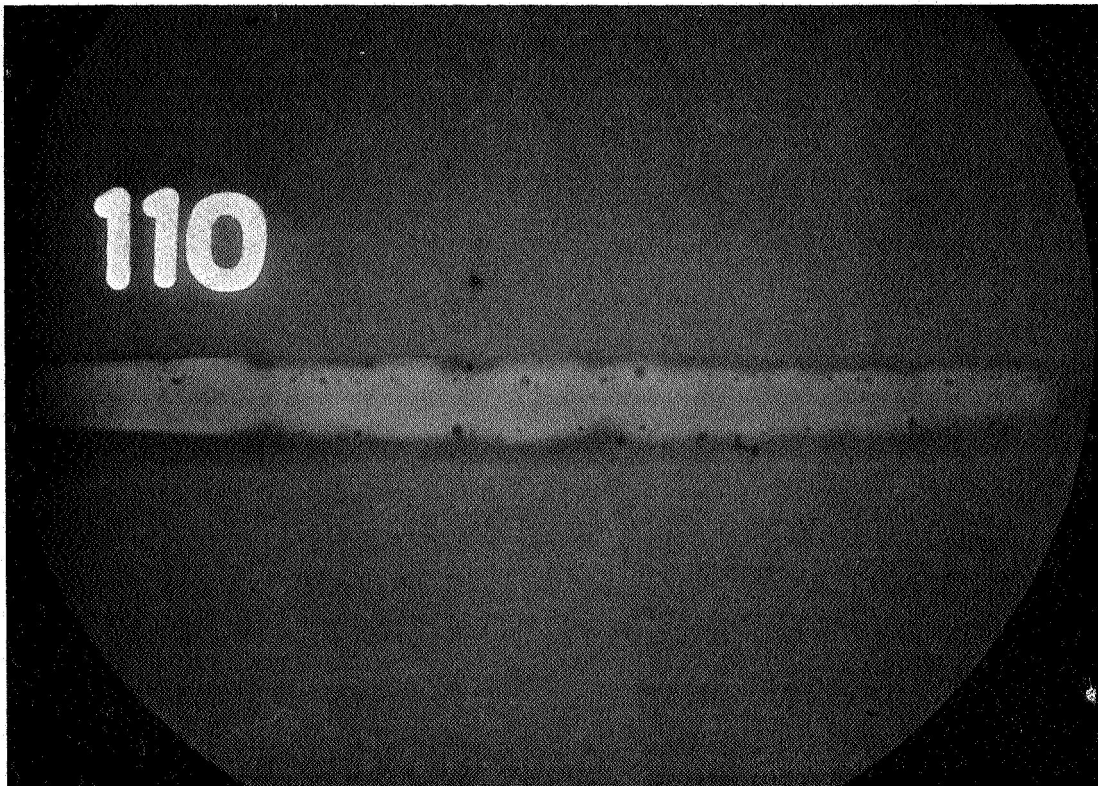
Out-of-Vacuum Electron Beam Weld
